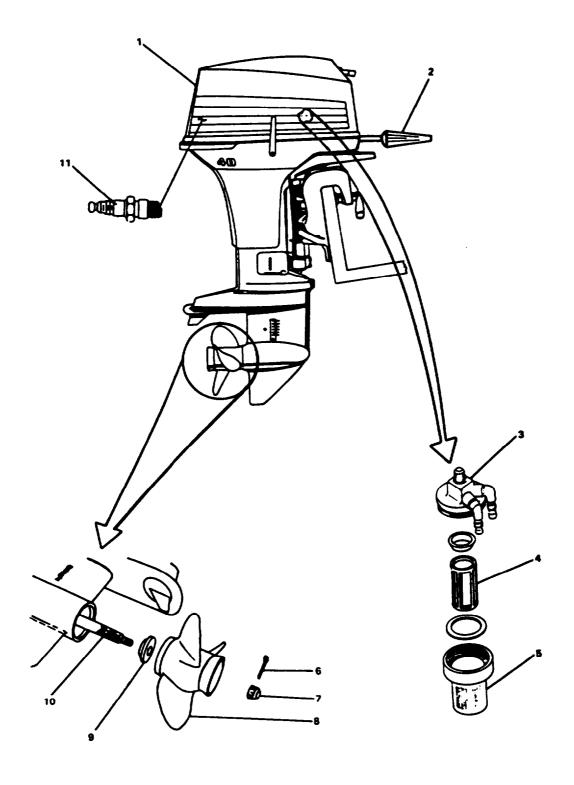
Outboard Motor (Sheet 1 of 2).
